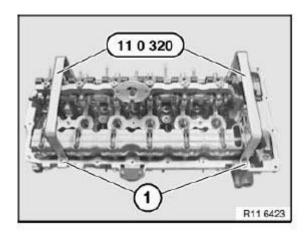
Identifying Cylinder Head Cover Bolts And Special Tool (11 0 320) Courtesy of BMW OF NORTH AMERICA, INC.
